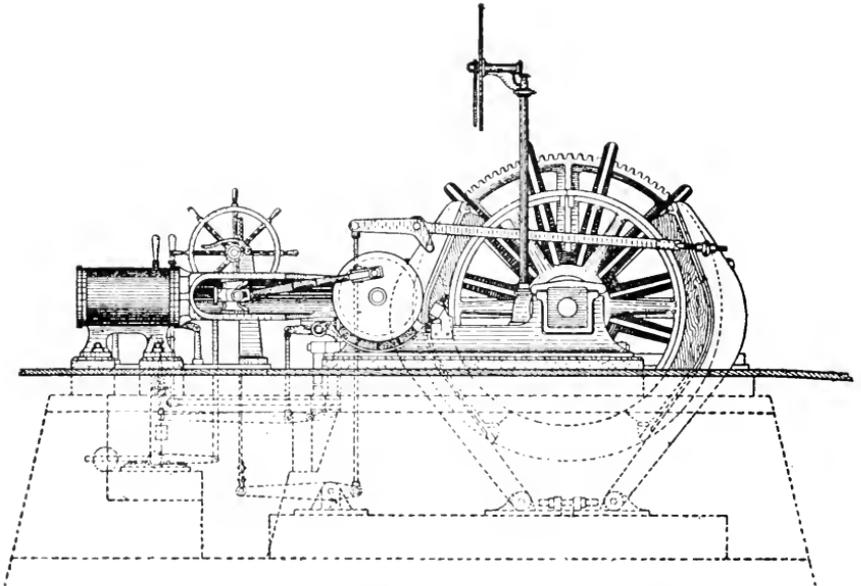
GEARED HOISTING ENGINE, DOUBLE REELS, FLAT ROPE.
